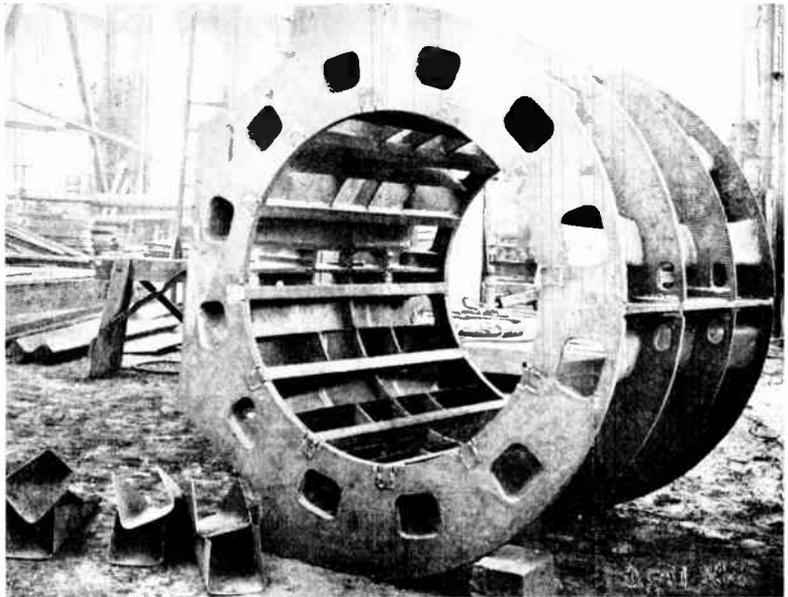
How WELDING IS APPLIED IN INDUSTRIAL MANUFACTURE. Showing a steel fabricated stator housing.
